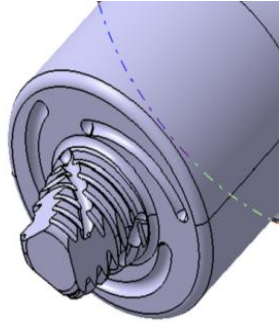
Weld tool configuration with right-hand threads and left-hand CounterFlow™ flats.
